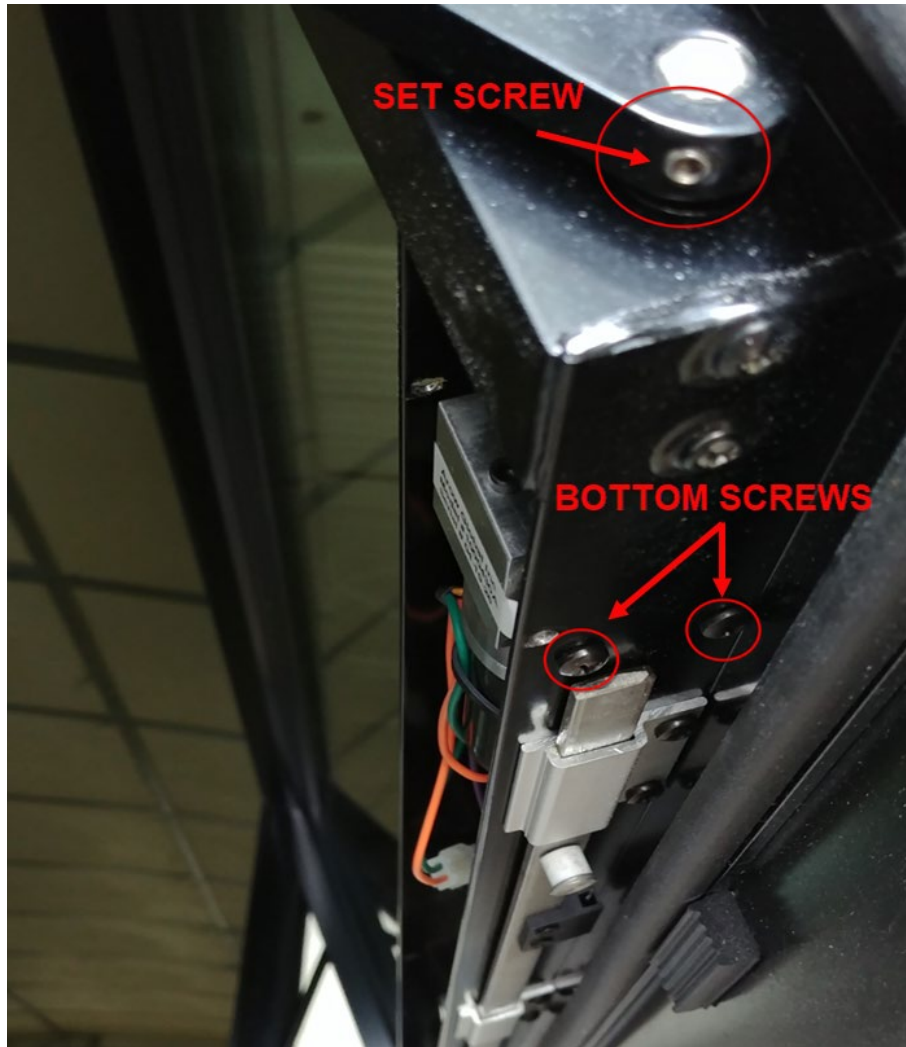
ARM SET SCREW (TO MOTOR SHAFT) & MOTOR BOTTOM SCREWS (2X)
